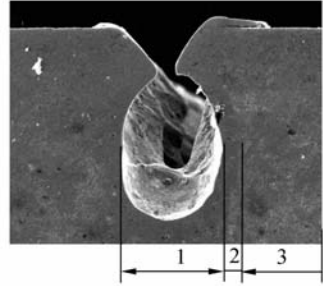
Experiment of fracture notch produced by laser cutting
